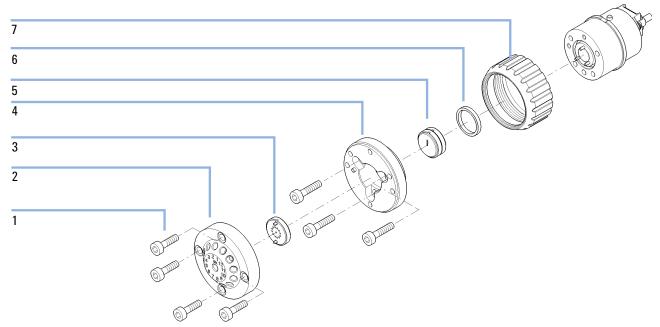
Valve Head Parts (example shows a 5067-4159 valve head)
